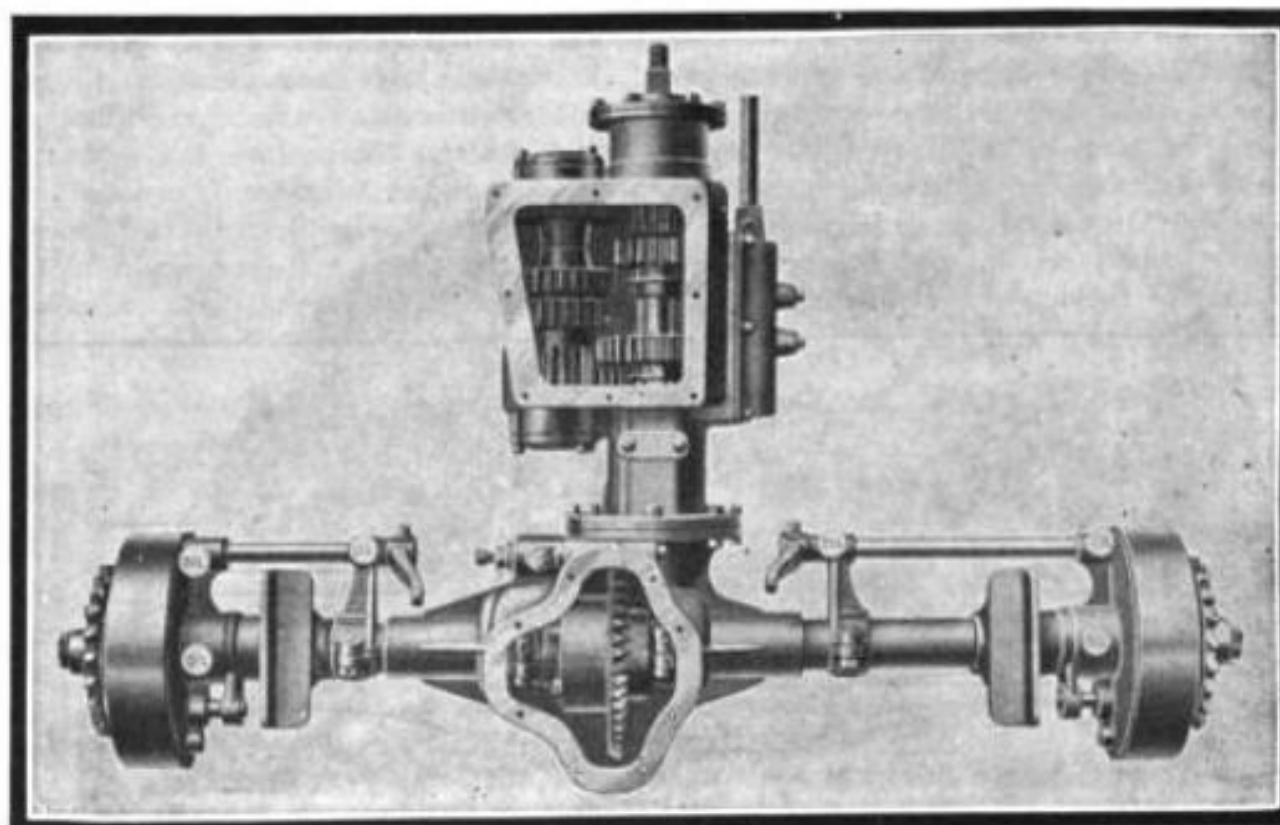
NEW COMBINED GEARSET AND JACKSHAFT OF MUNCIE GEAR WORKS
